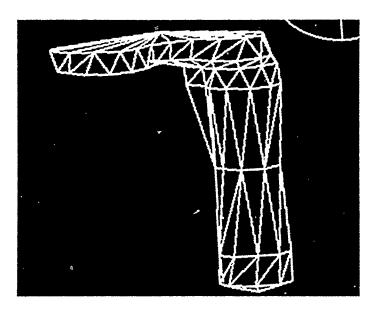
3-Dimensional Reconstruction of Solder Joint
